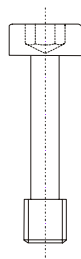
Attachment at the Carriage (for Mounting Detail see Figure 9)
